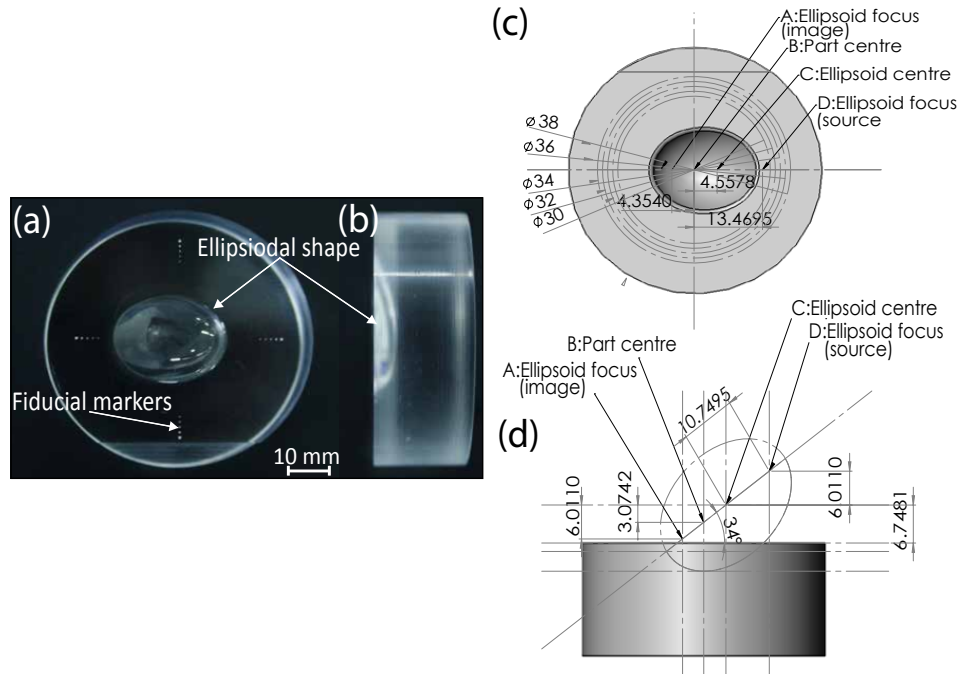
(a) and (b) Photographs of the manufactured diamond machined FPM optic showing: (a) the front surface and (b) a side view, demonstrating the ellipsoidal structure. The fiducial markers highlighted are used for alignment of the optic. (c) and (d) Schematic drawing of the FPM design, again showing (c) the front surface and (d) a side view; both annotated with the relevant geometry positions.
